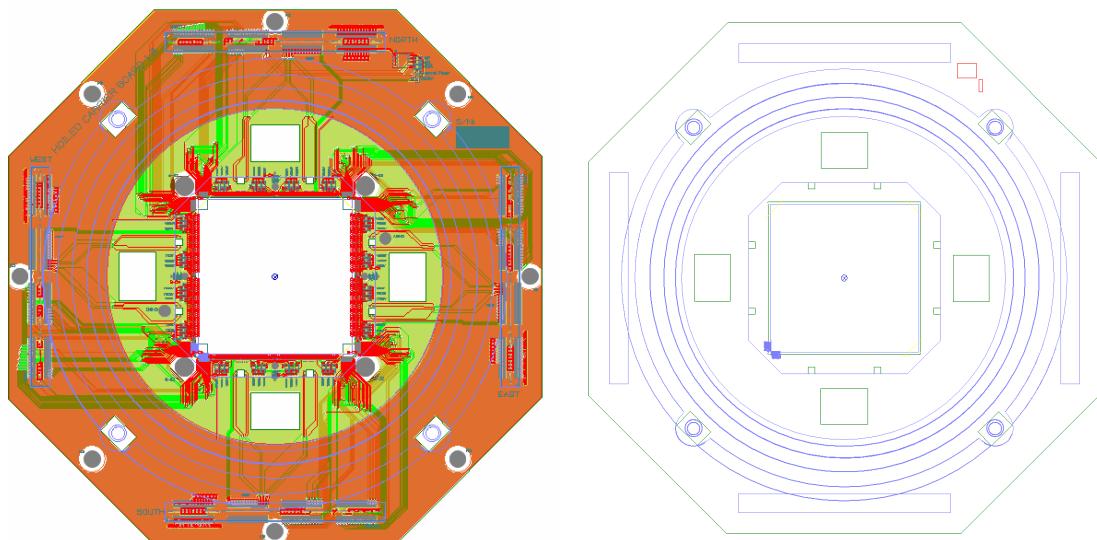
HDILED Carrier PCB layout; left is an image of all layers of PCB Layout, right is an image of the document layer and board Outline of PCB layout.
